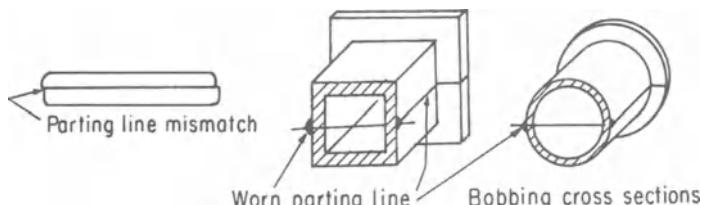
Excessive wear on mold parting lines can create a mismatch on a molded part that will appear greatly exaggerated [a 0.0003-in. (0.0008-cm) mismatch can appear to be 0.020 in. (0.05 cm)] or can create burrs from 0.001 to as much as 0.010 in. (0.003 to 0.025 cm).
